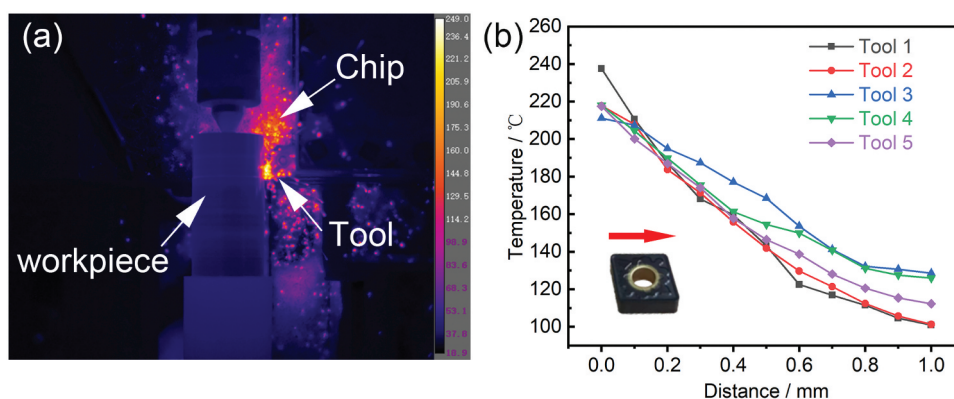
Photos of cutting temperature: (a) measurement, (b) temperature distribution of turning tool.
